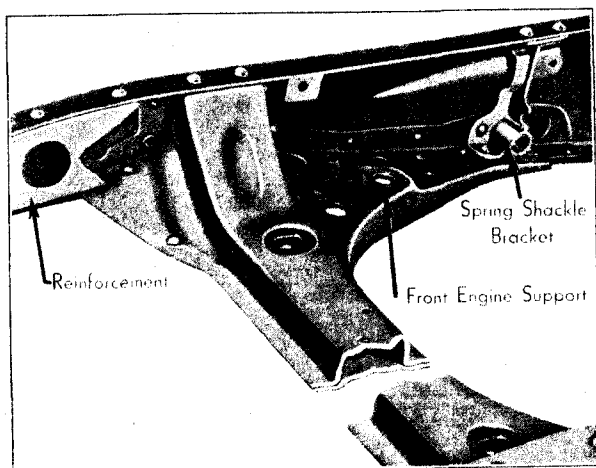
The front cross member extends back far enough to support the front end of the engine
